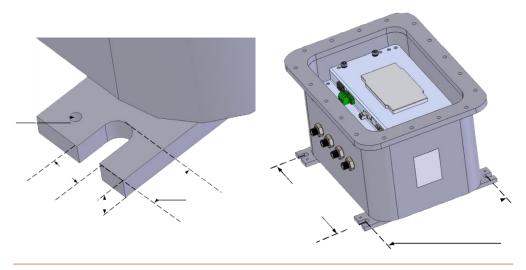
Hazardous Environment Enclosure Stainless Steel Enclosure Mounting Points
